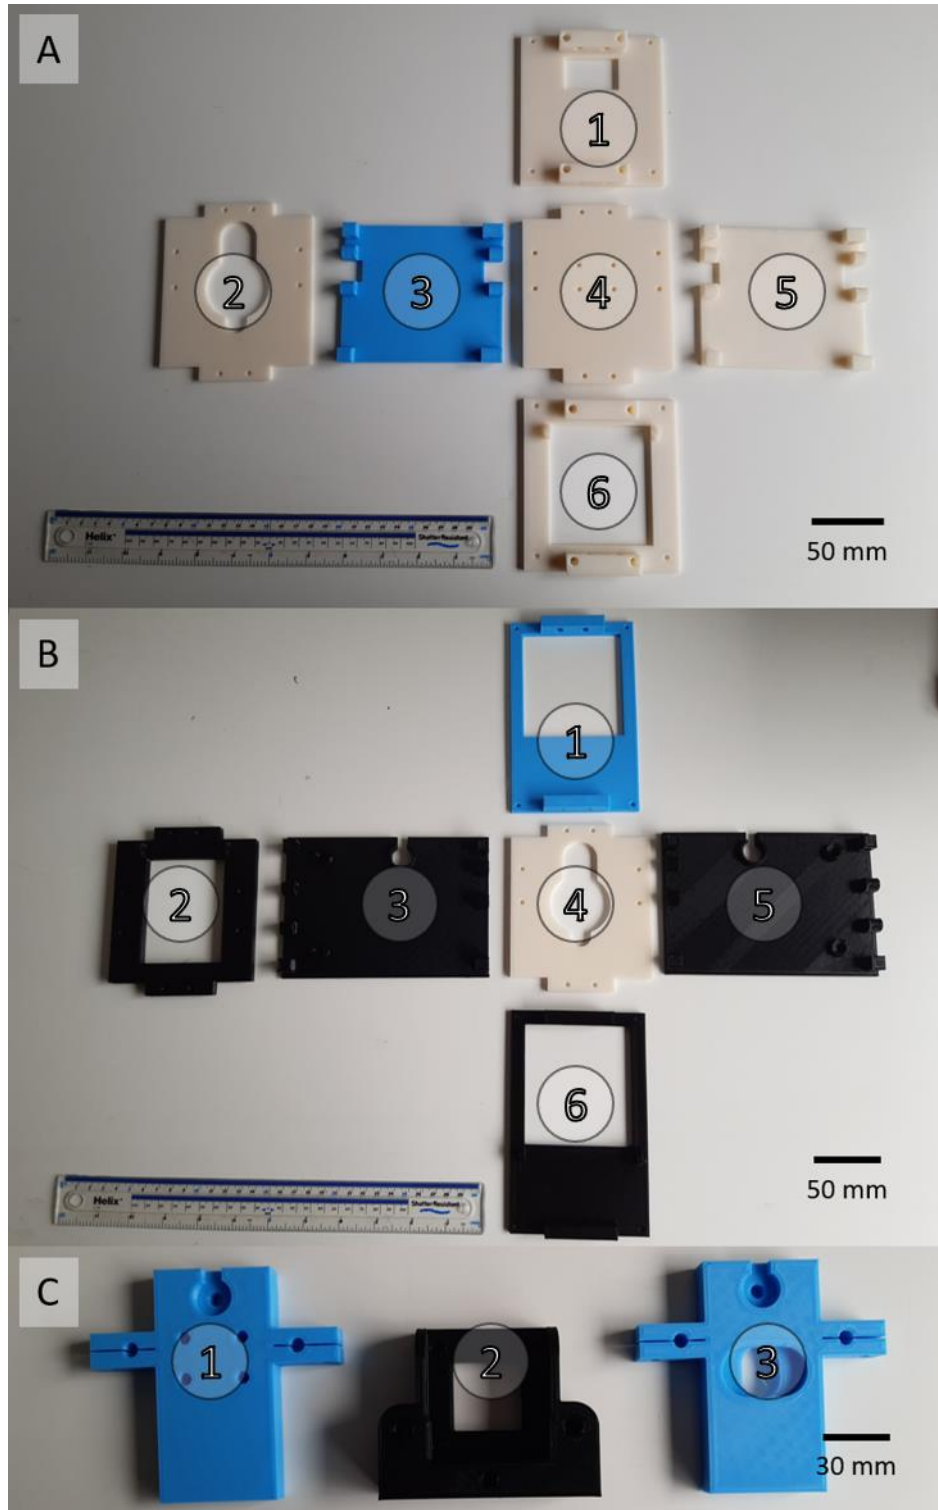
Sample Preparation Device fabricated using FDM printing (1st iteration)
